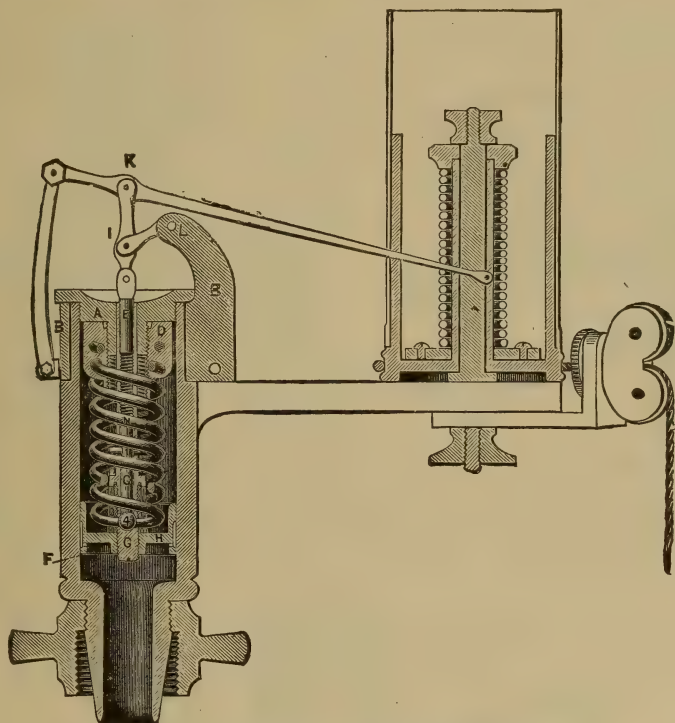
SECTION OF THE CROSBY INDICATOR.
